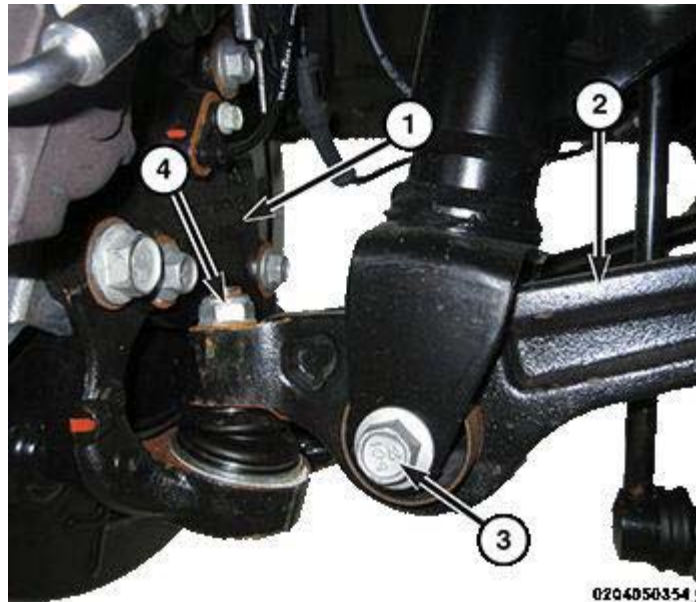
Knuckle, Lower Control Arm, Strut To Lower Control Arm Bolt & Lower Ball Joint To Knuckle Nut
